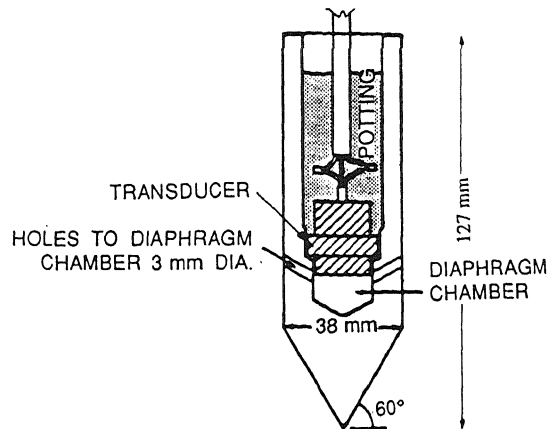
USGS Piezometer assembly used at Wildlife Site.
